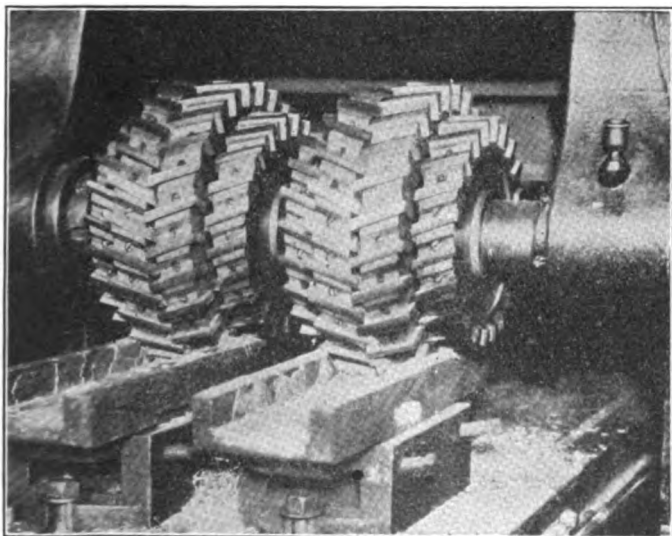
Milling the guide bar fit of crosshead shoes using a gang of inserted tooth interlocked arbor cutters
